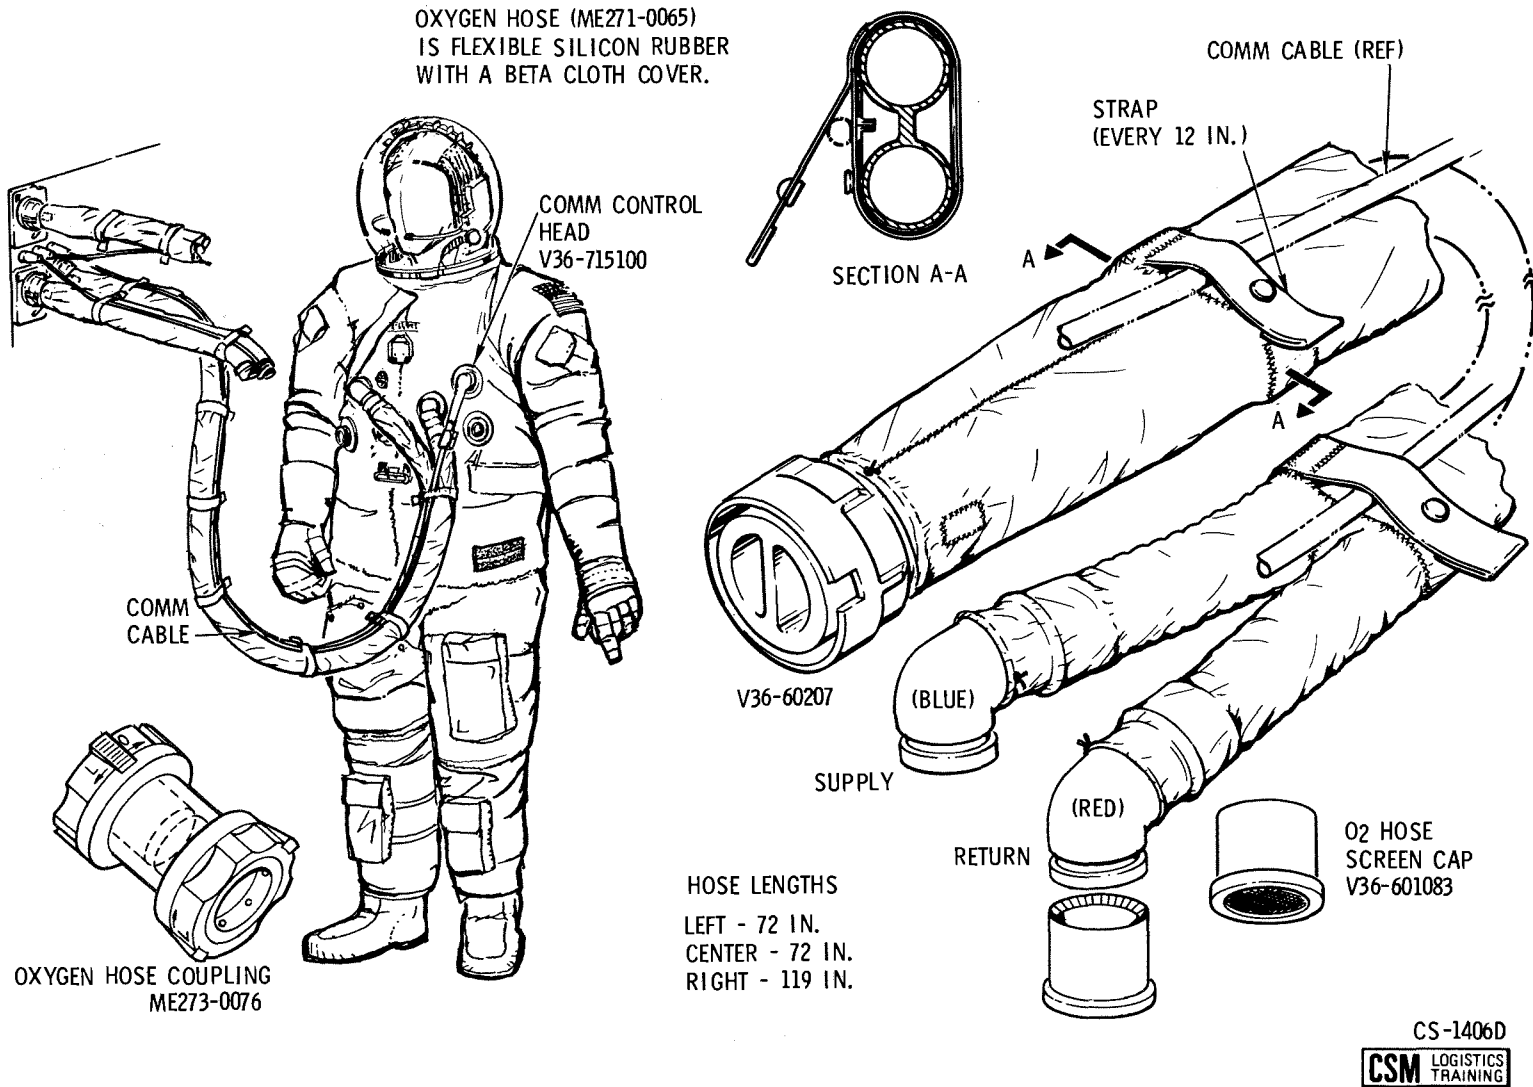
Oxygen Hose Assembly and Accessories
